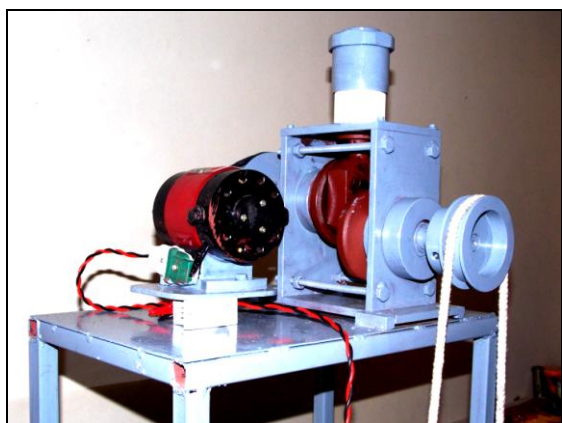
Photograph of Assembly of Single Ball Traction Drive
